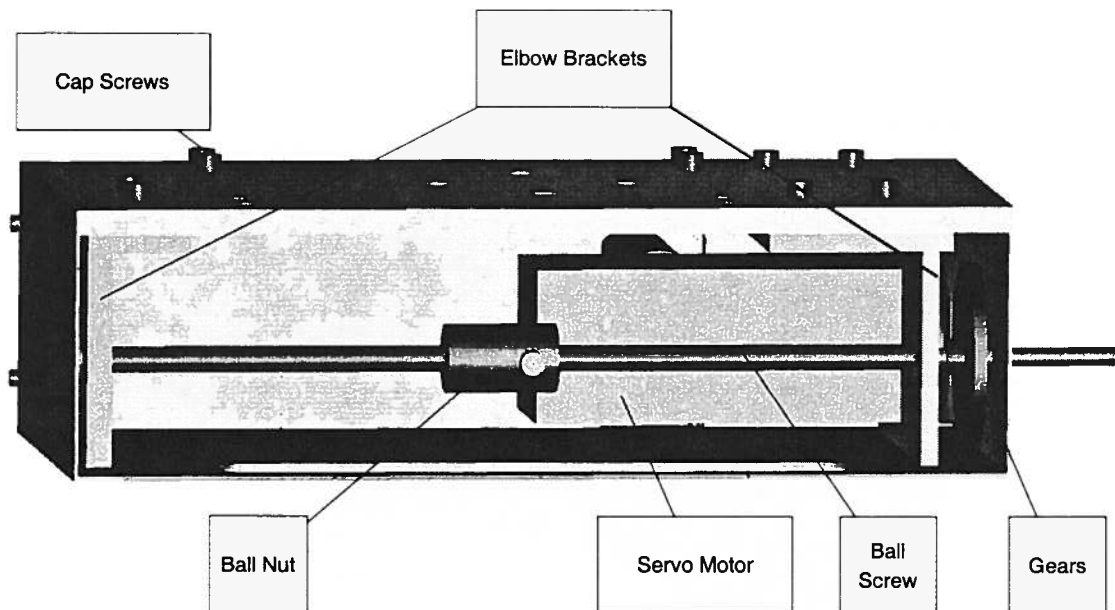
Side View of Ground Enclosure with One Side Removed
